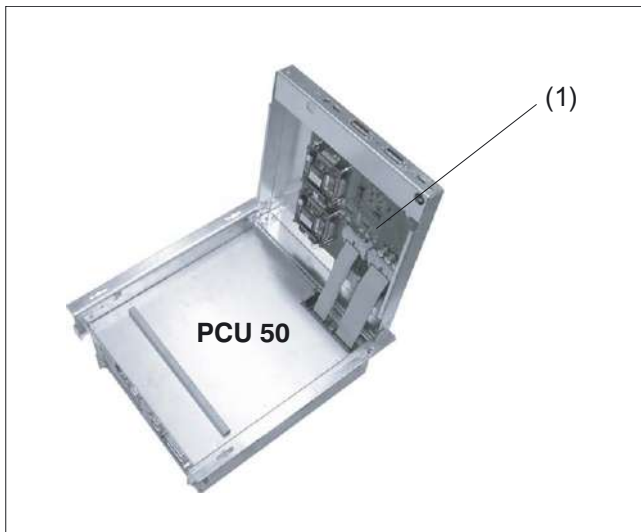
Videolink transmitter hooked into place with the hinge bolts
